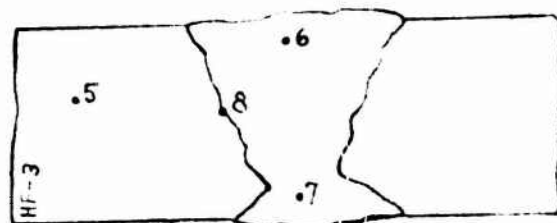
SINGLE V JOINT WELDED WITH LOW ALLOY
